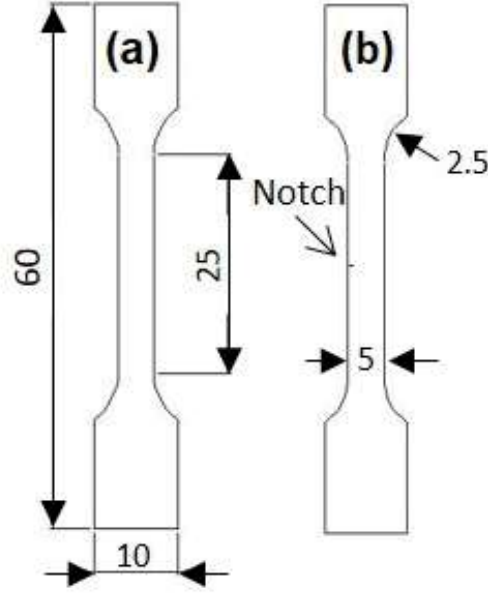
(a) Specimen configurations used for tensile testing and (b) specimen to track short fatigue crack propagation ahead of notch (all dimensions are in mm)
